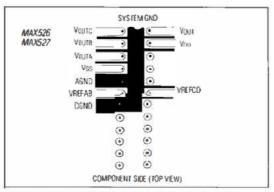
Suggested PCB Layout for Minimizing Crosstalk
